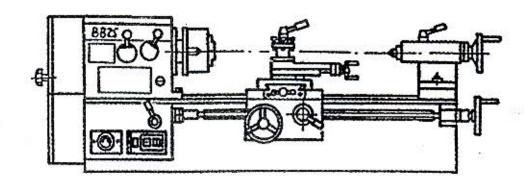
BV25B-1 CUTTING MACHINE (LONGITUDINAL LEADSCREW WITHHANDLE)
